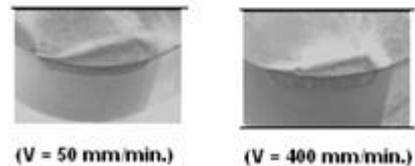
SEM pictures of PCD tools used to machine SiC-MMC(X-100 after Etching) Machined surface
